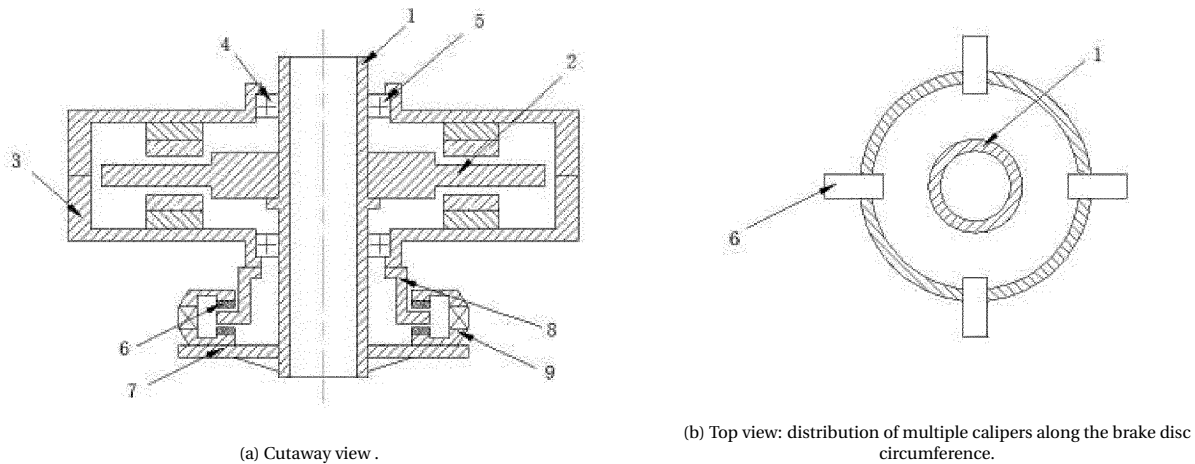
Example of a VAWT installed with a disc braking device [71]. (1) drive shaft, (2) generator stator, (3) generator rotor, (4) and (5) bearings, (6) brake shoes, (7) brake support, (8) brake disc and (9) caliper jaws.
